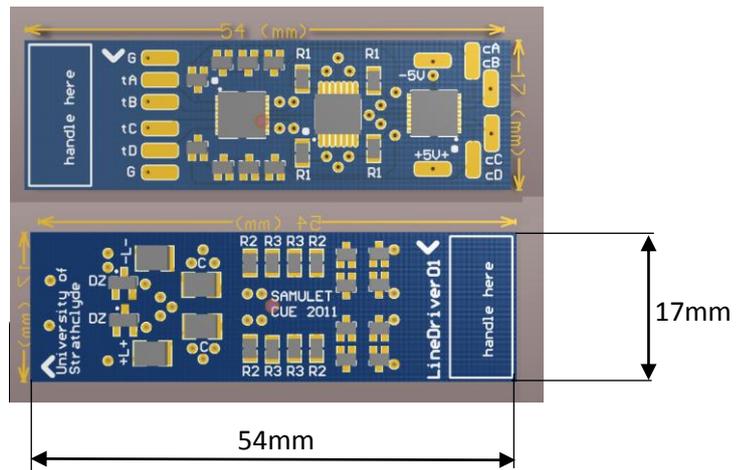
visualization of PCB Layout of the proposed line driver, 4 channels per board.
